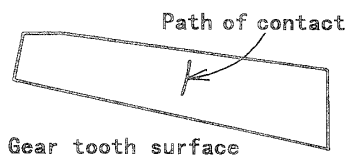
Path of contact on gear tooth surface of concave side(as summary)
